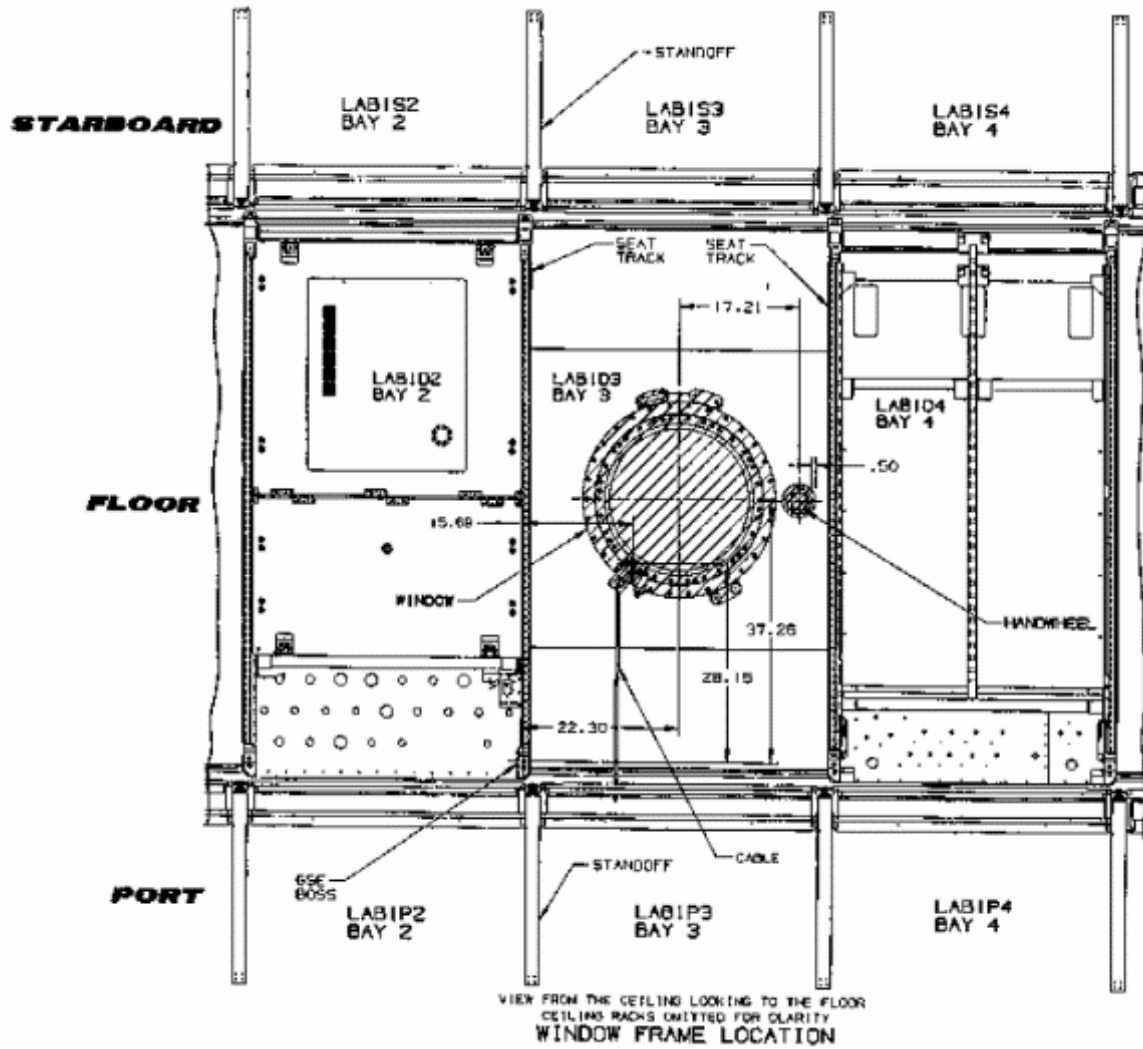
LAB WINDOW KEEP-OUT ZONE (PAGE 1 OF 2)
